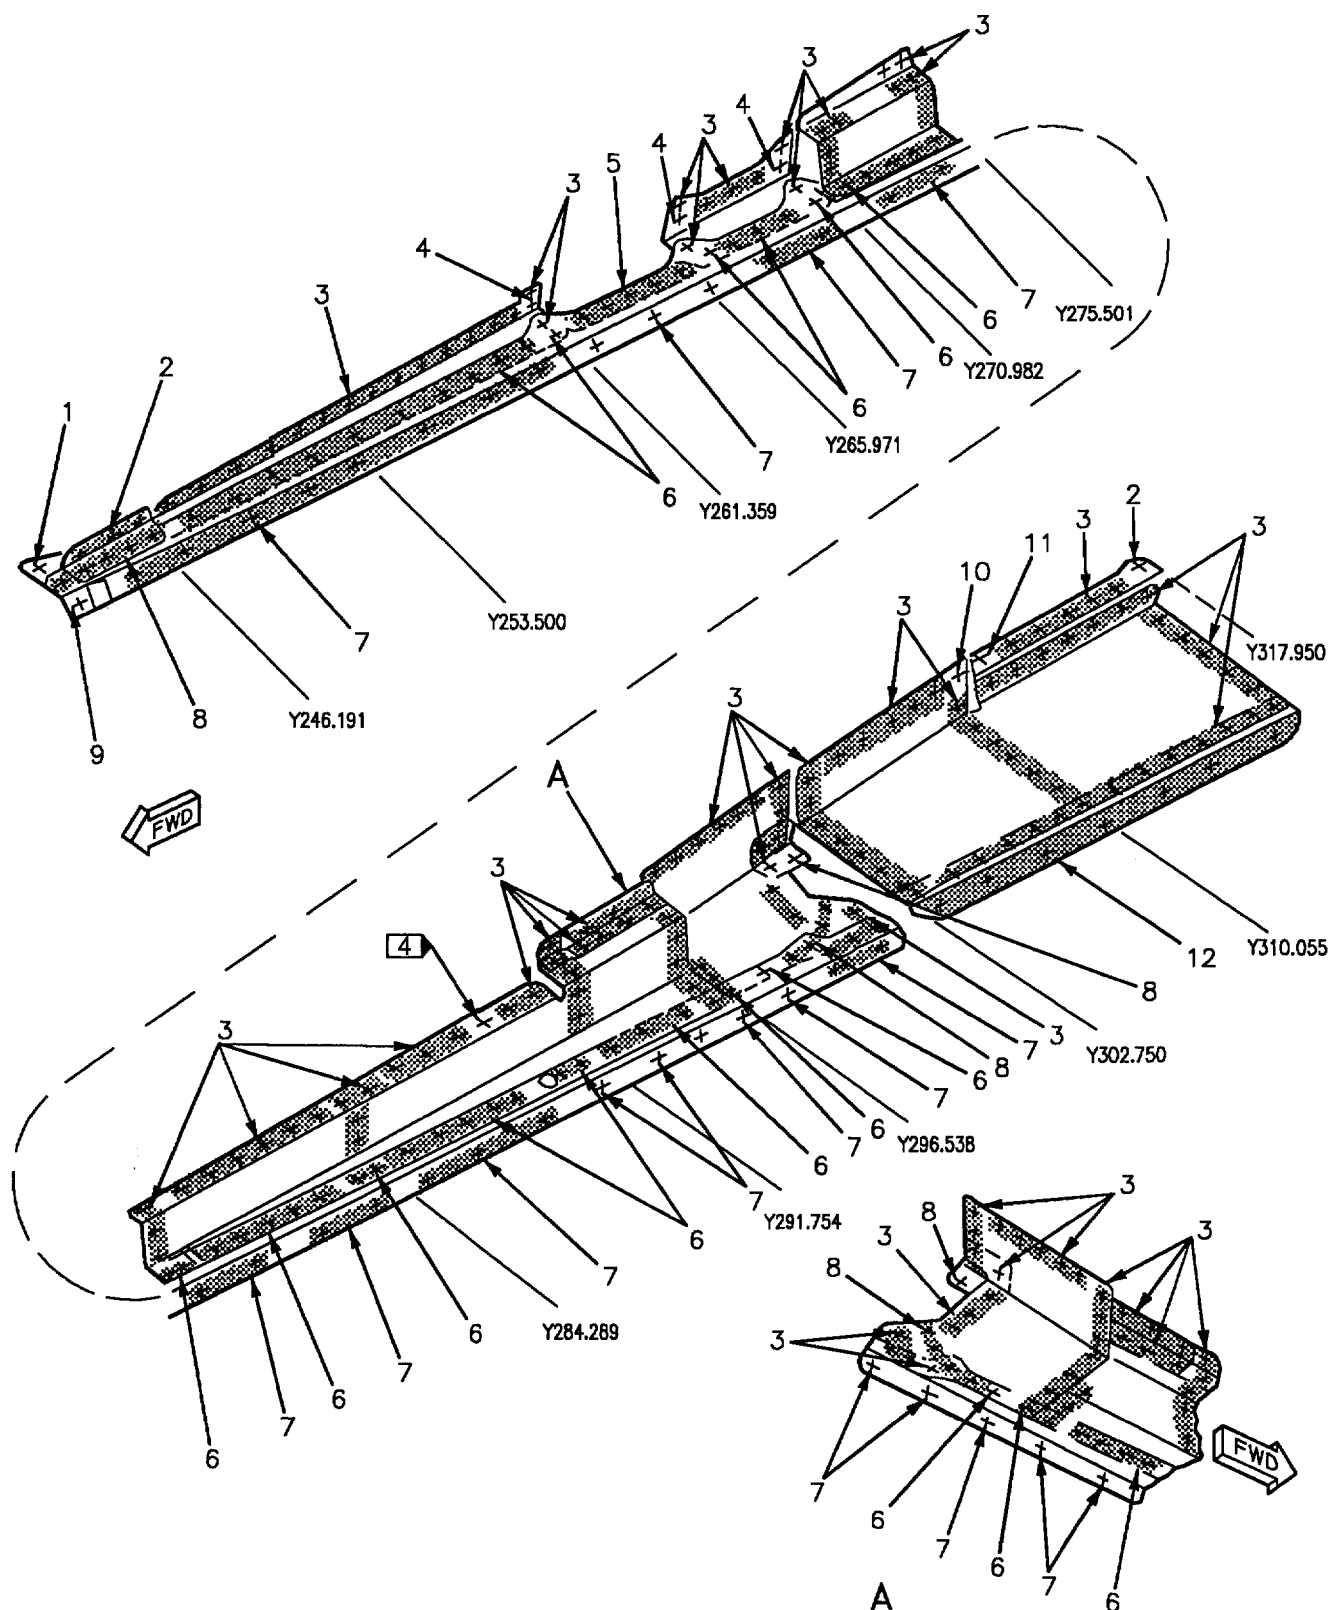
Lower Fairing Support, 74A350772, Fastener Index (Sheet 1)
